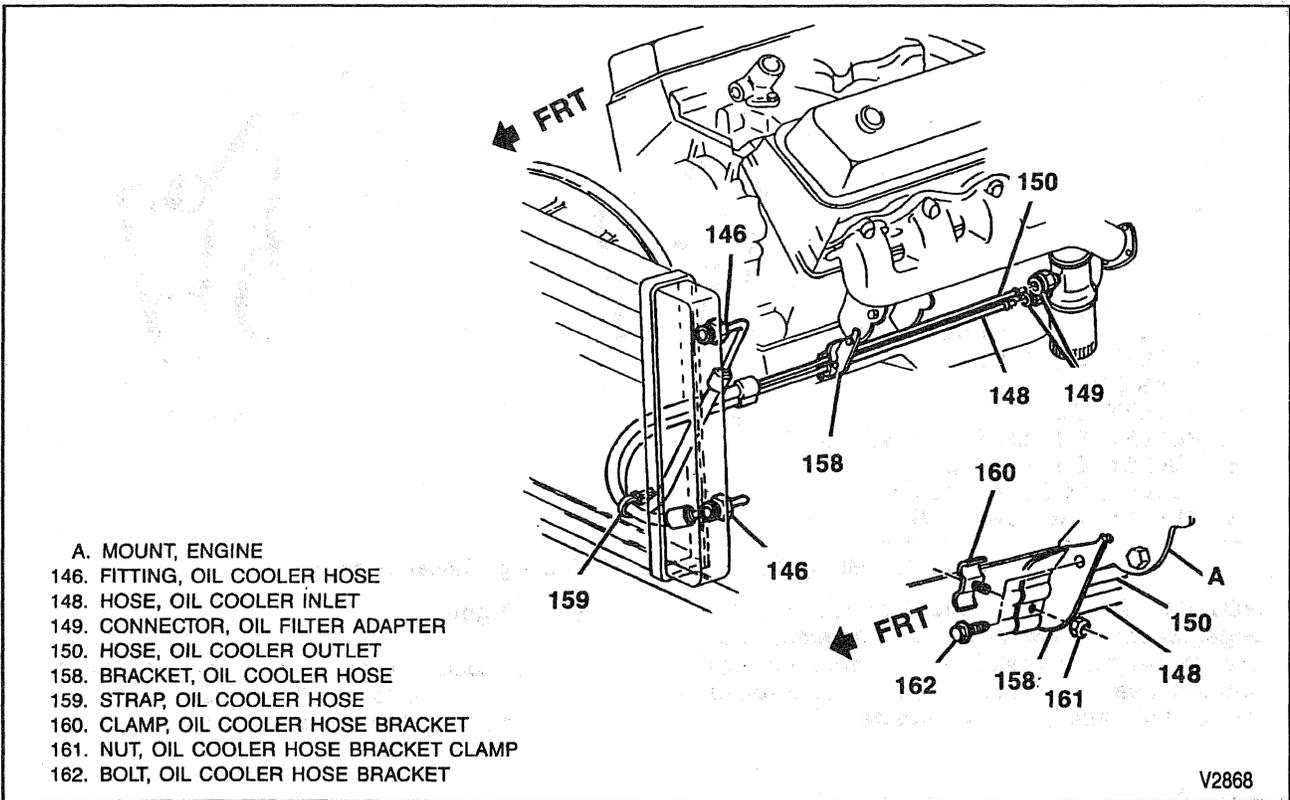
Engine Oil Cooler Lines and Components (5.0/5.7L Engines with KC4 Cooling)
